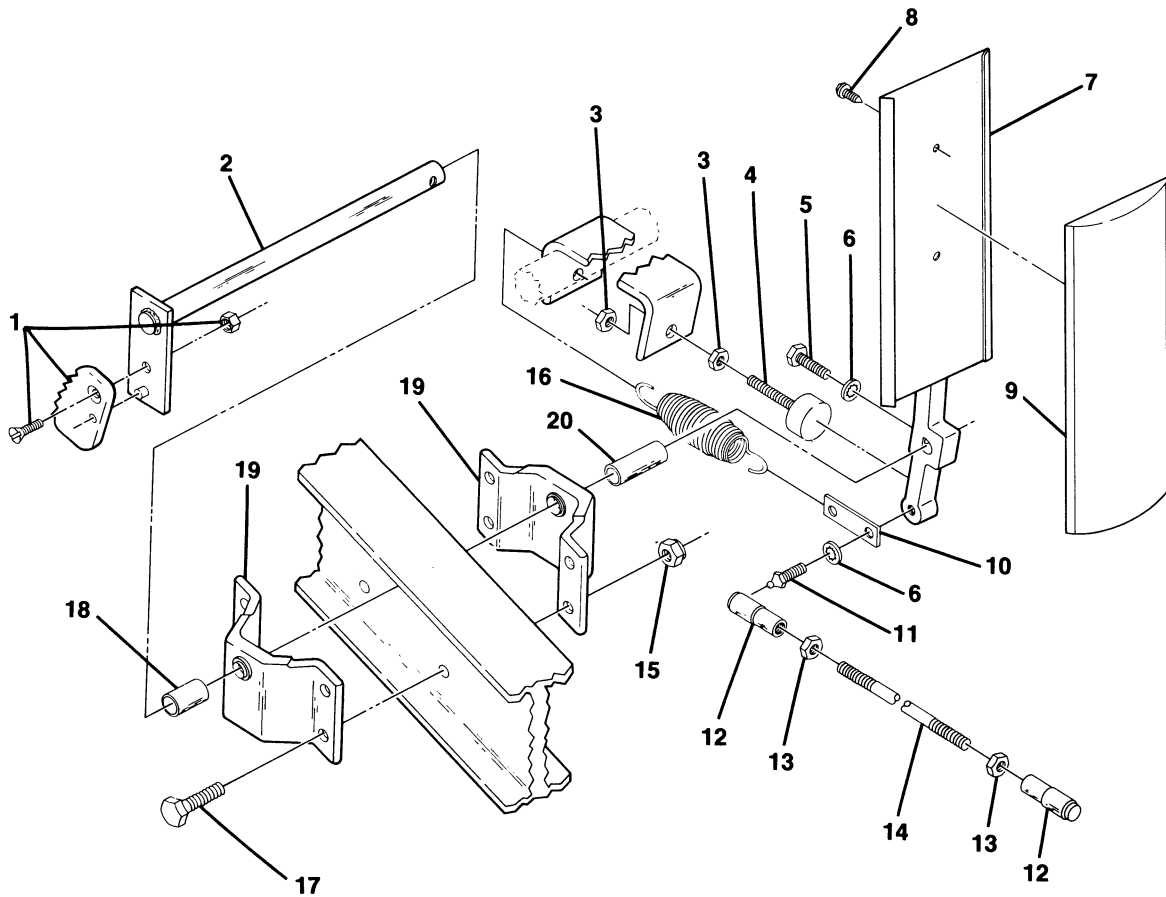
ACCELERATOR PEDAL ASSEMBLY. SEE LIST 4-3.
